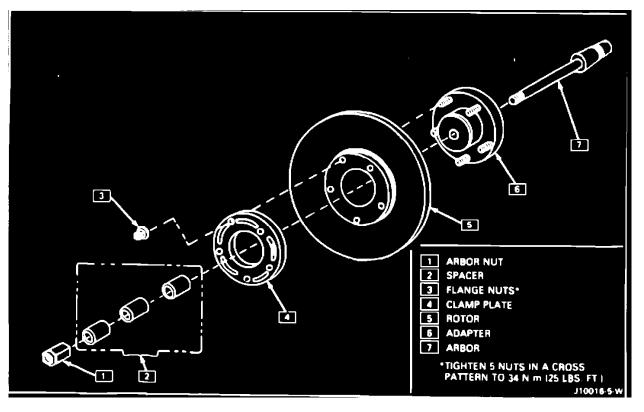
ROTOR MOUNTING ADAPTER - J 37160
